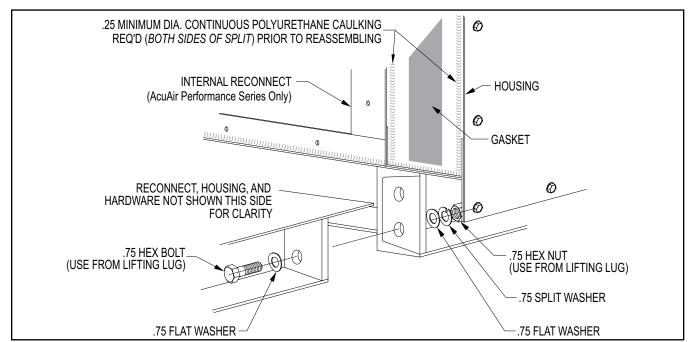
Base Assembly Attachment - Relates to AcuAir Performance Series Unit Only
